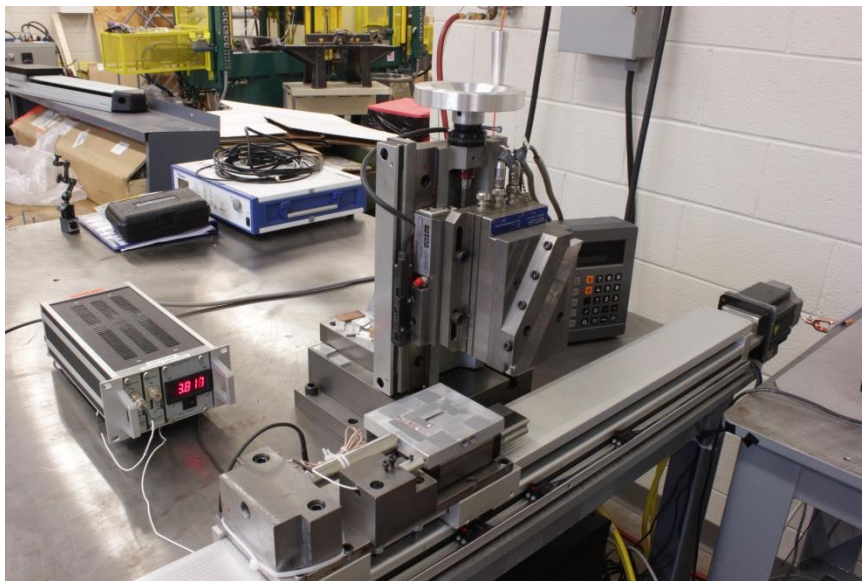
Isometric view of planer assembly, analogous to Fig. 4.1.
